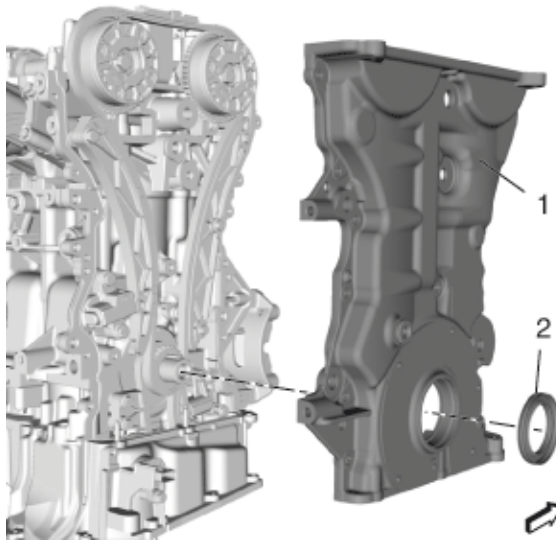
Engine Front Cover And Crankshaft Front Oil Seal
